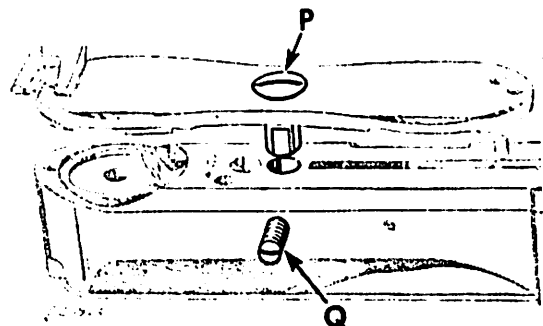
Correct Position of Hinge Pin in Needle Plate
